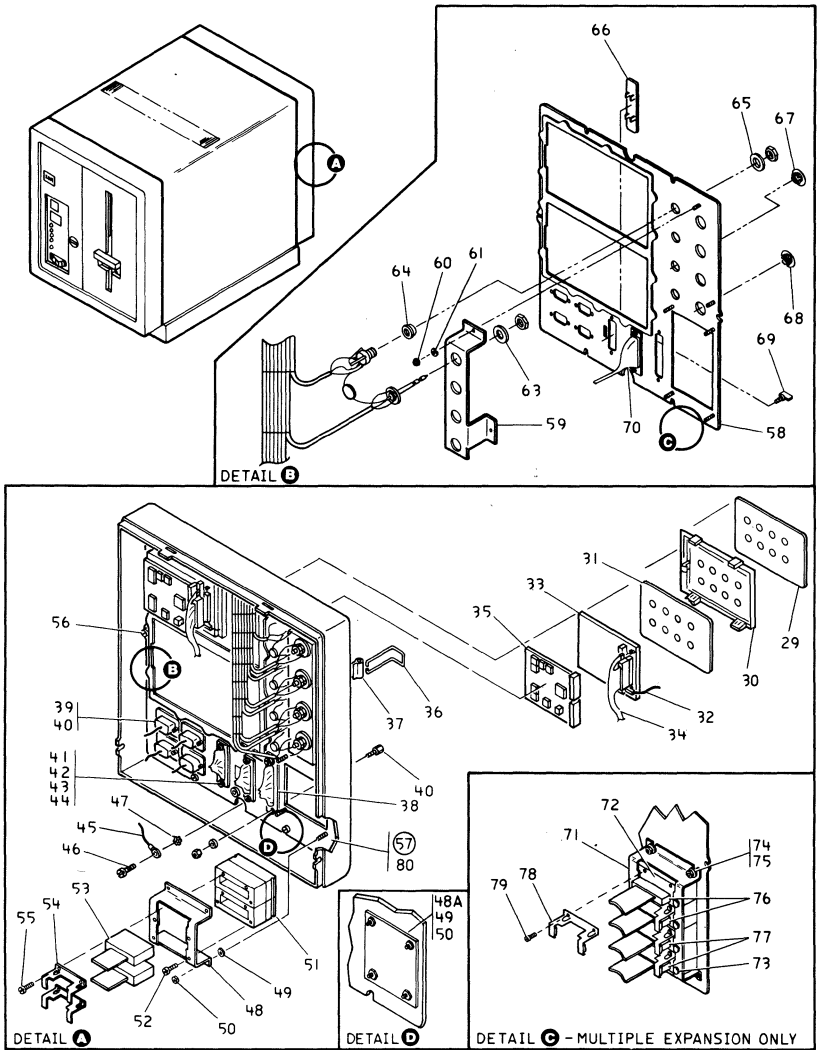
4701 CONTROLLER ASSEMBLY (2 of 5)
